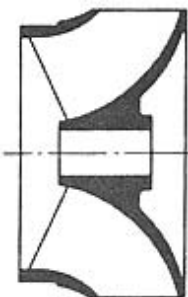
Mixed flow impeller (helical impeller, diagonal impeller) (front view with front coverplate removed)
